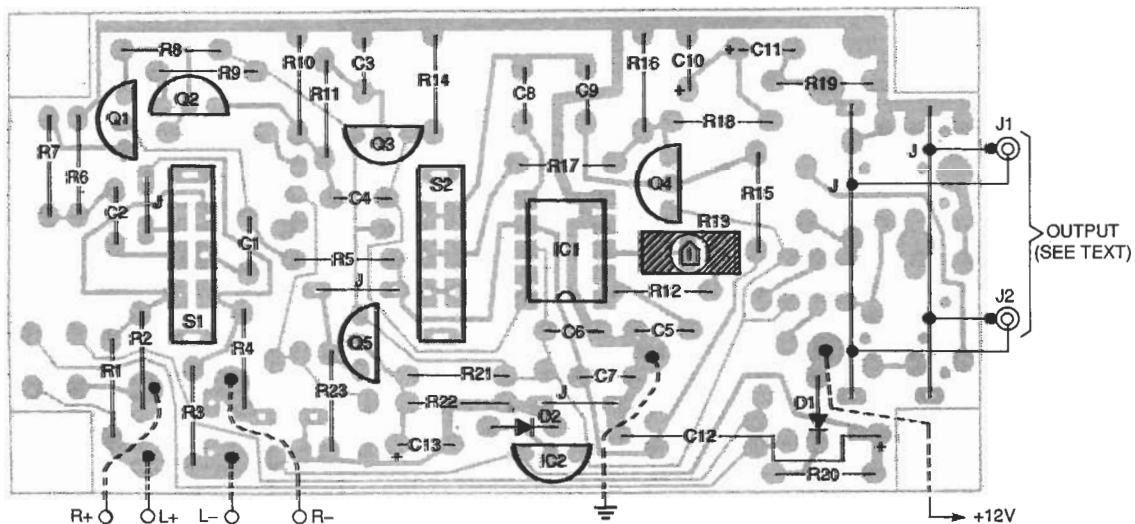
PARTS-PLACEMENT DIAGRAM for the crossover PC board. The board is designed to accommodate two different crossover circuits; That's why many parts appear to be left out.
